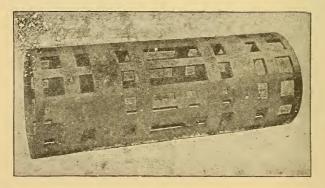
Bushing of Piston-valve Seat, Vauclain Compound Locomotive.
